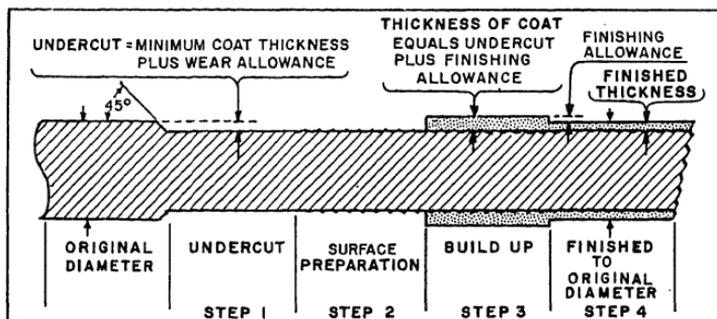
Major steps in restoration of dimensions with thermal spray.
